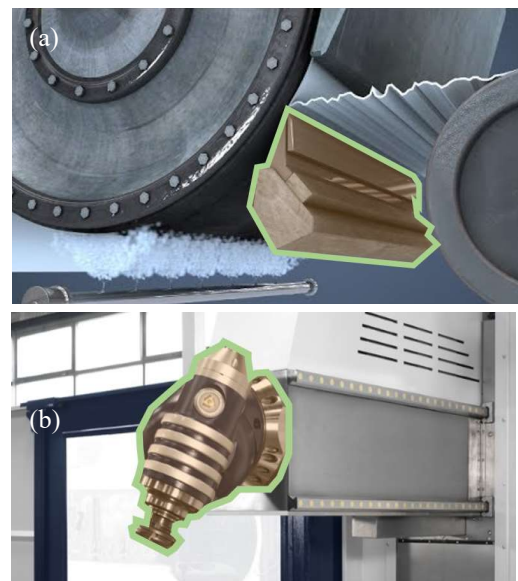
(a) Illustration of the creeping blade and (b) of a highly moving spindle head.
